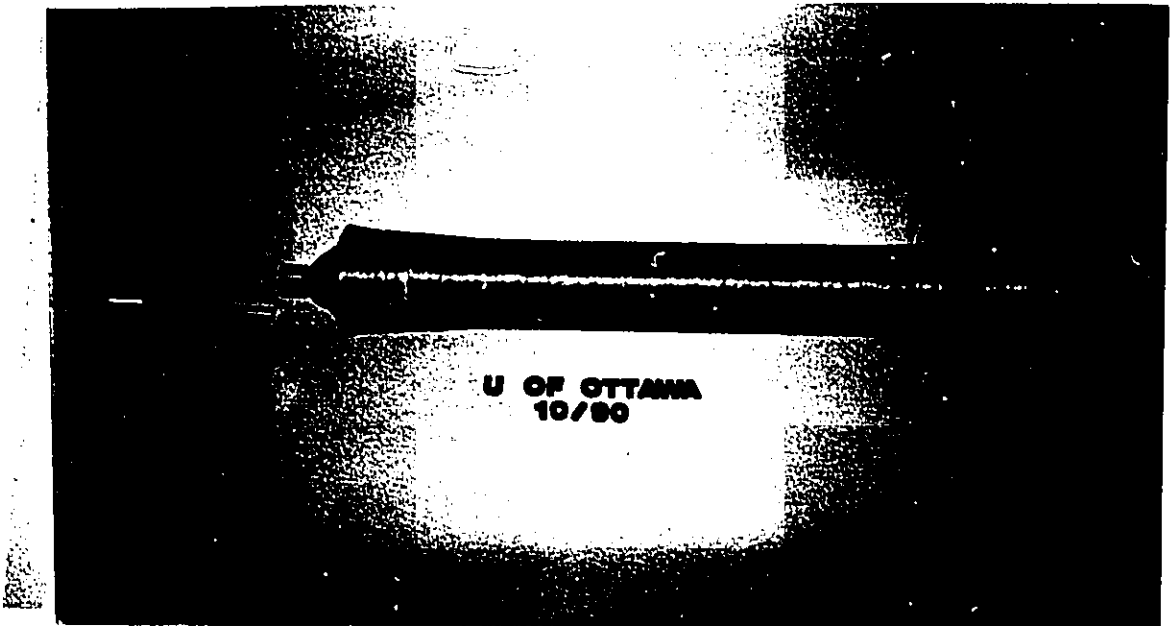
Completed 265 Mpa Vessel With End Fittings
